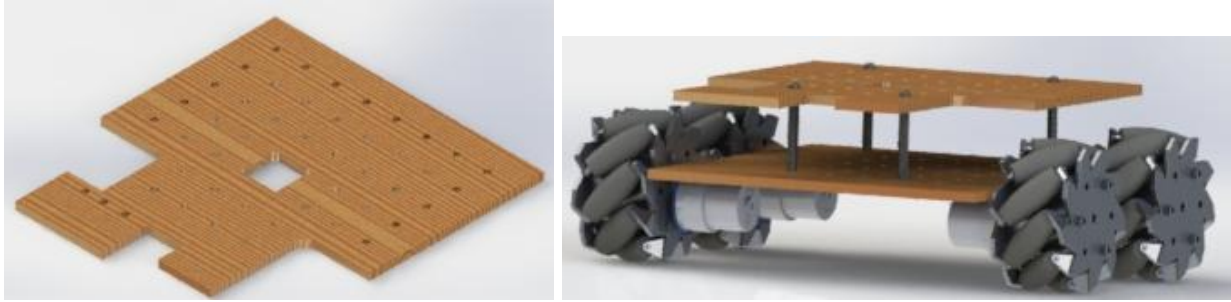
Chassis layer 2 (left) and chassis layer 2 connected to chassis layer 1 with wheel/motor/bracket assembly.
